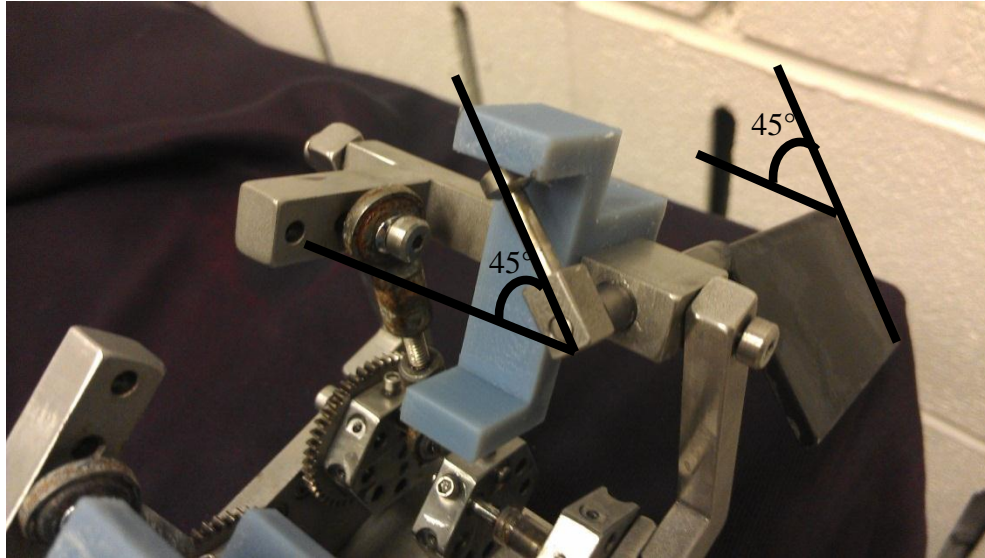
Installed Passive Rotation Stop with RSSR Linkages Removed
